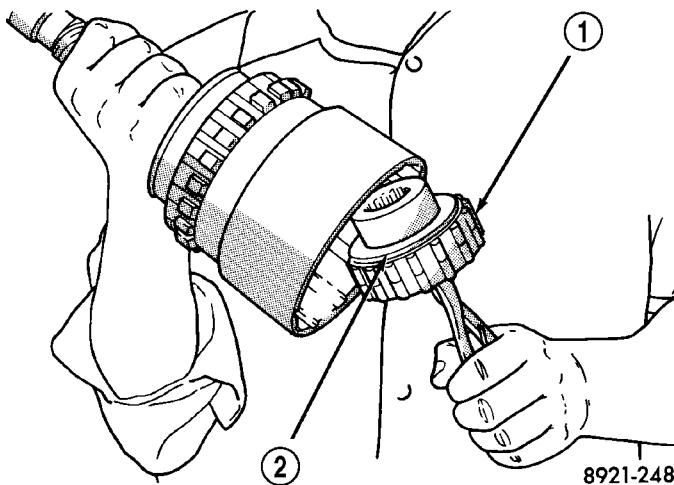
Removing Sun Gear, Thrust Bearing And Planetary Gear
